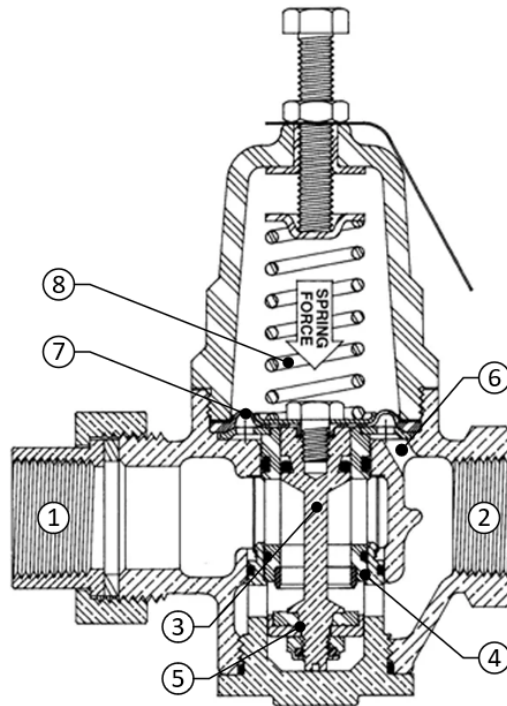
Pressure Reducing Valve drawing [34], modified by the author. (1): Inlet port, (2) Outlet port, (3) Valve stem, (4) Valve seat, (5) Main valve, (6) Pressure Sensing Port, (7) Diaphragm, (8) Spring
